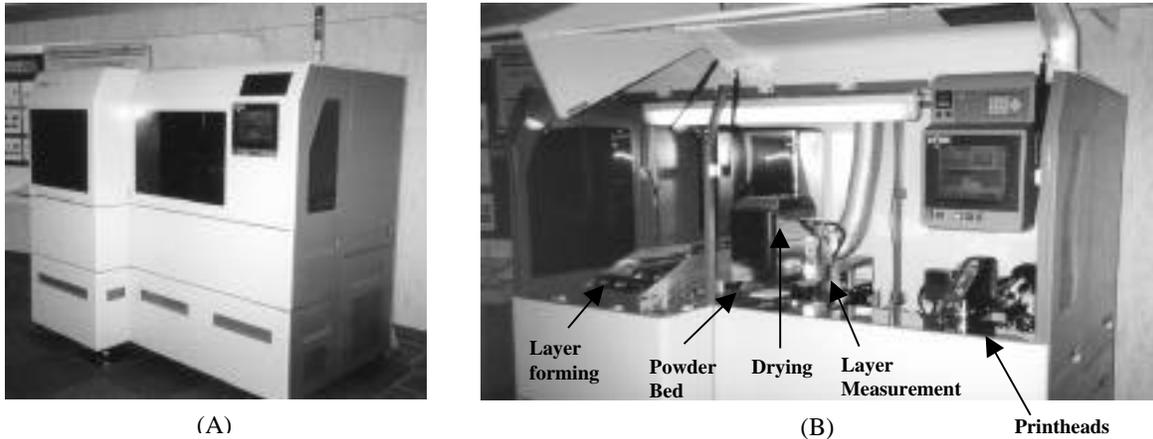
Linear Moving Bed, Vector Print machine built jointly by TDK and MIT, with hood closed (A) and with hood open (B).
